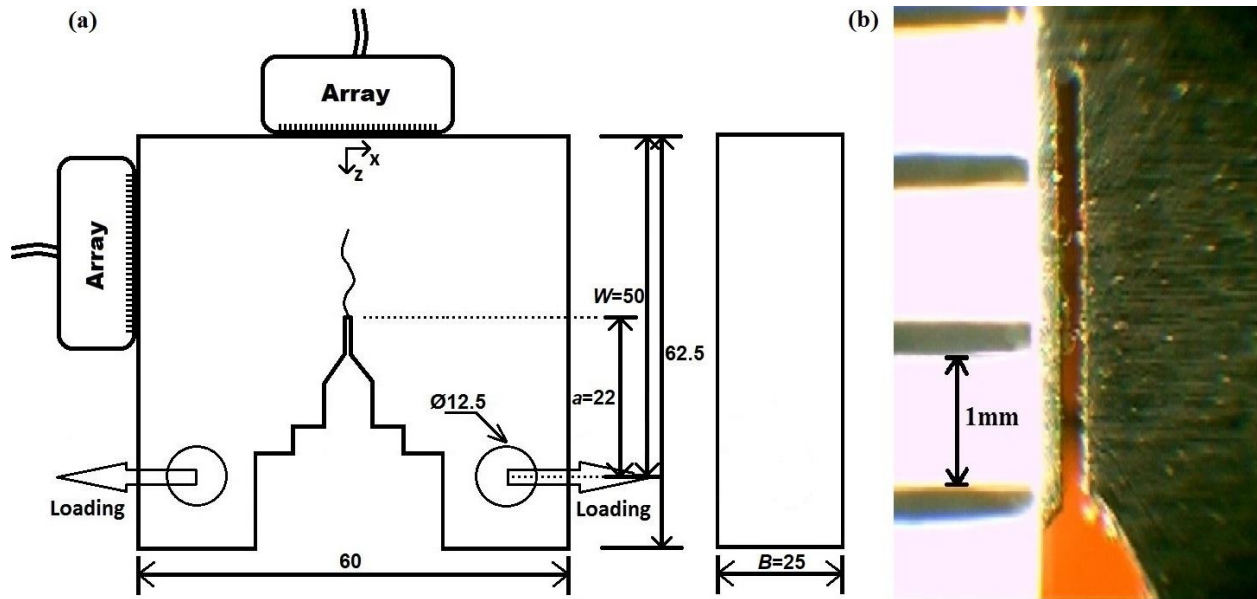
(a) Schematic diagram of nonlinear and linear phased array measurement configuration on CT specimen (dimensions in mm) and (b) photograph (zoomed in with a millimetre scale) of the 0.1 mm wide notch on the CT specimen before fatigue test.
